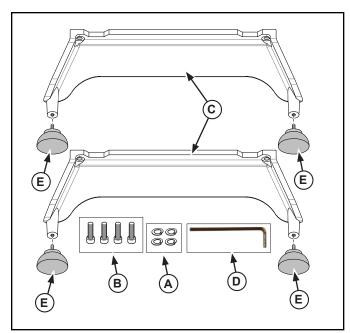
Legs, Hardware and Tool for the Fruit Cutter.
